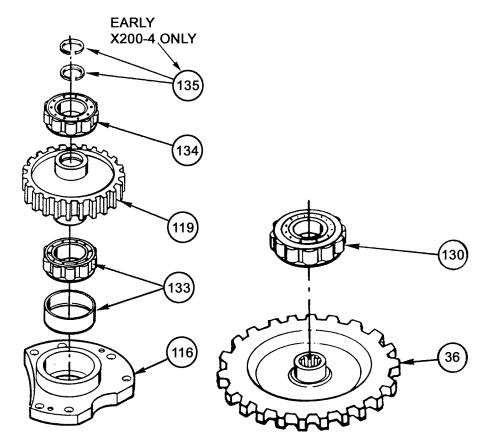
Hydrostatic Pump Idler Gear and Bearing Retaining Plate. REPLACE BEARINGS ON SPUR GEARS AND SHAFTS – Cont.
